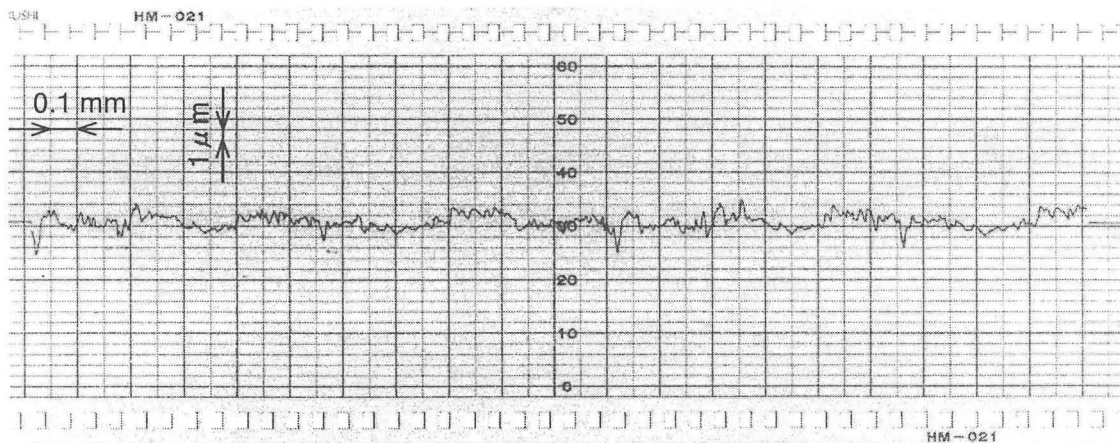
Surface roughness by facemilling (finish) of carbon steel
